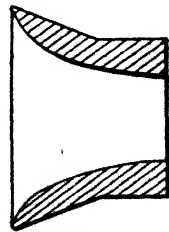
Section of bell through which small-sized skelp is drawn in order to curl it up and butt-weld the edges together.
